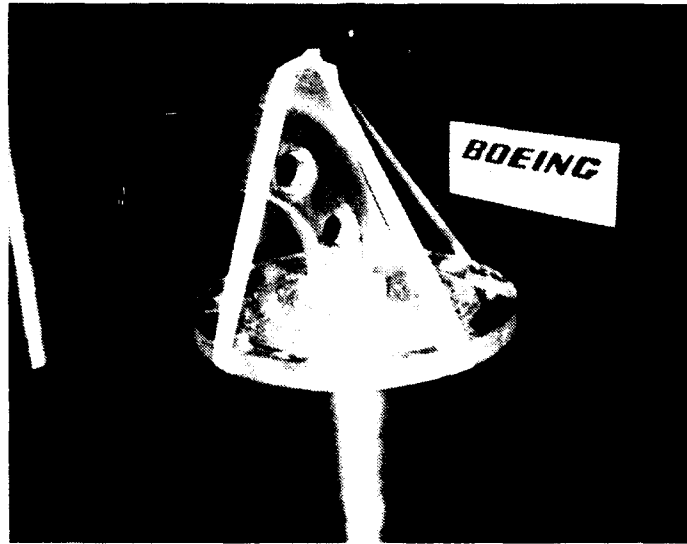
Aluminum forging containing a crack mounted on a CT system for examination.
